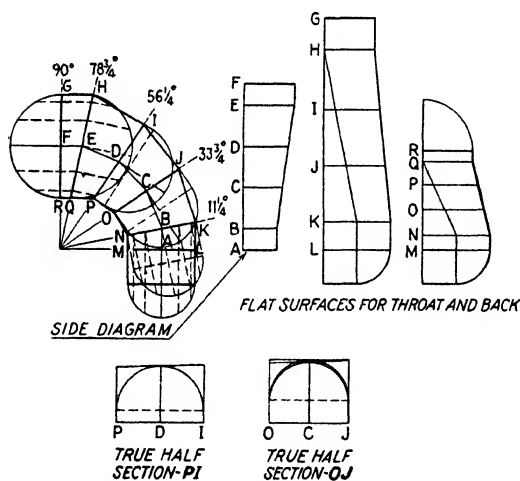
Five-piece oval-to-round elbow (on the flat).
